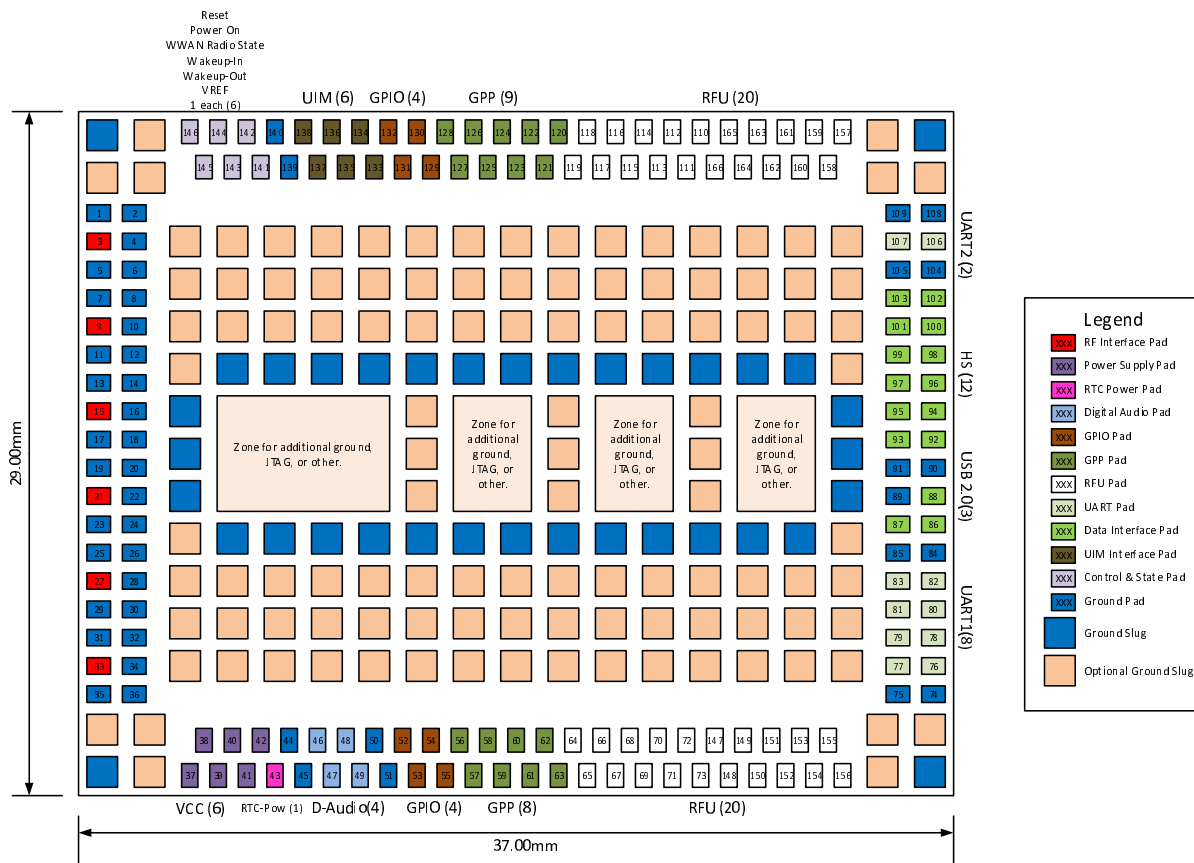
SMT3729 physical form factor (1 073 mm<sup>2</sup>), dimensions, pad numbering and placement
